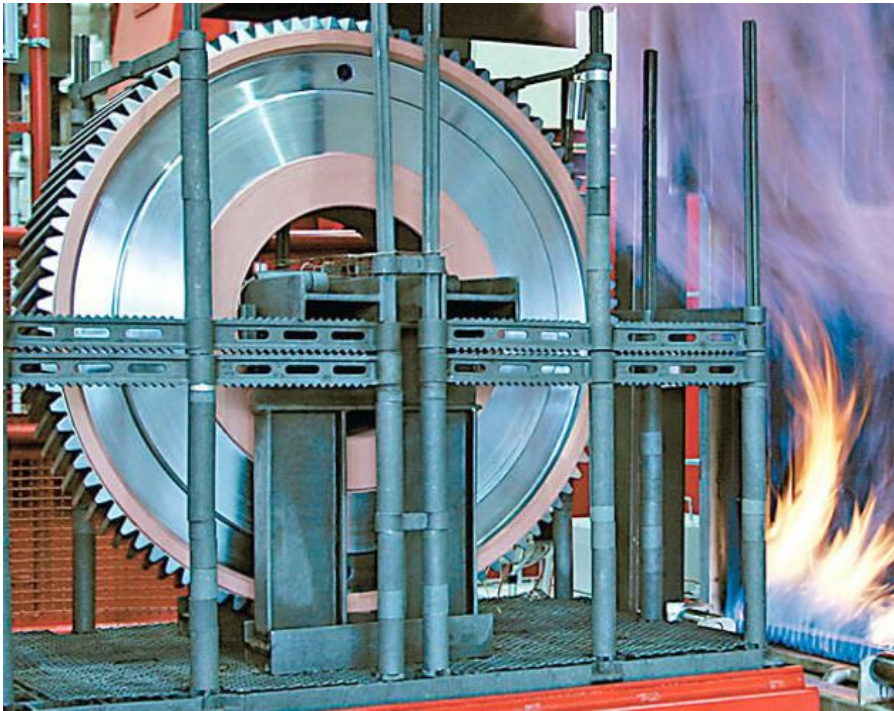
Atmosphere carburizing of large gears (photograph courtesy of Aichelin USA)
